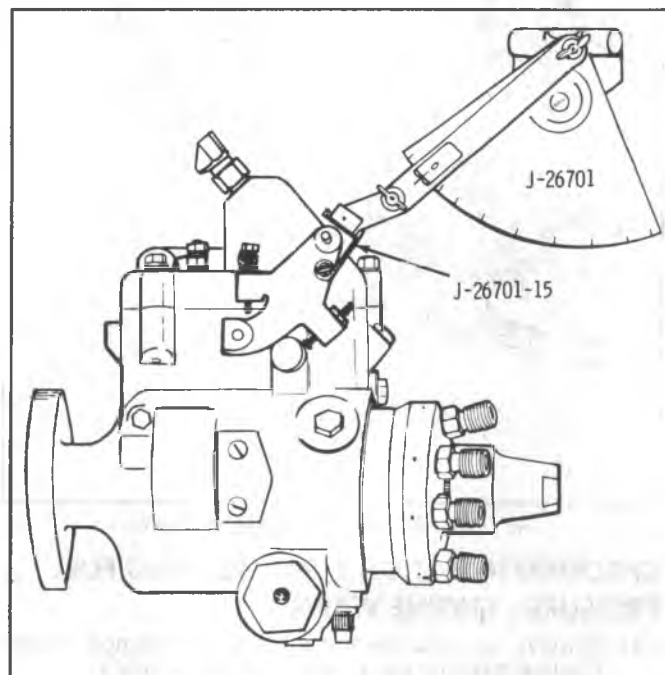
A6-17—Mounting Gage Vacuum Regulator Vacuum Adjustment
